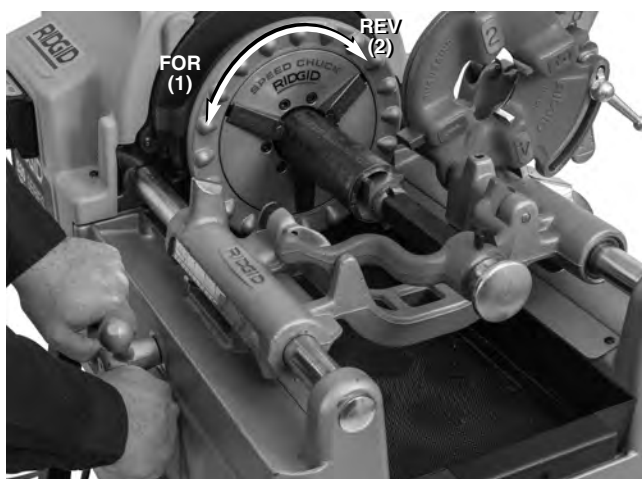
Reaming Pipe with Reamer, Machine Rotation
